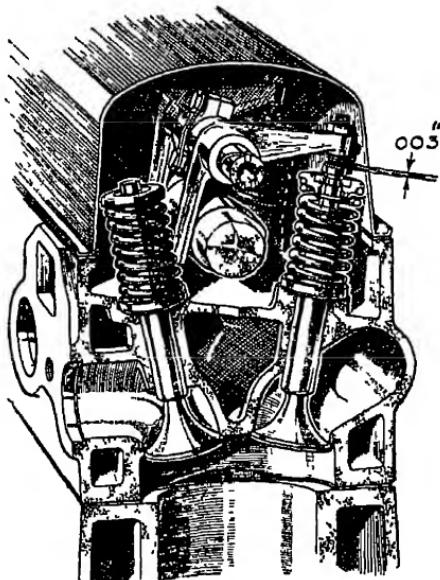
MORRIS VALVE GEAR WITH OVERHEAD CAMSHAFT
